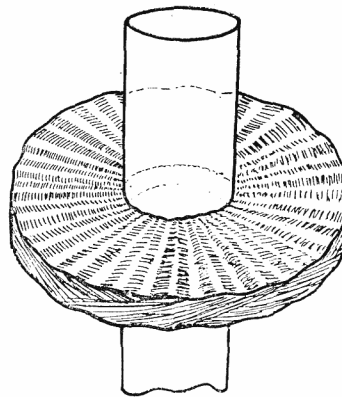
Illustration of side pattern obtained with suitable gear ratio.
